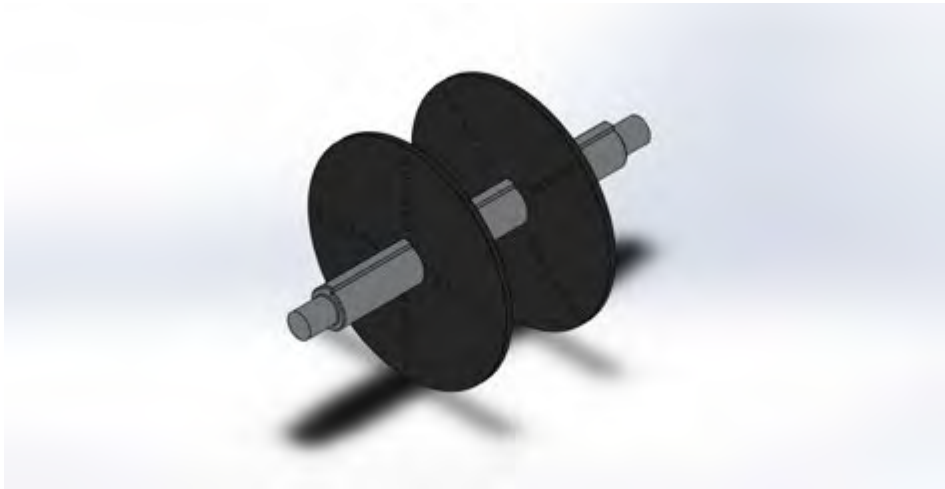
Assembly showing polyethylene discs assembled onto aluminium shaft.
